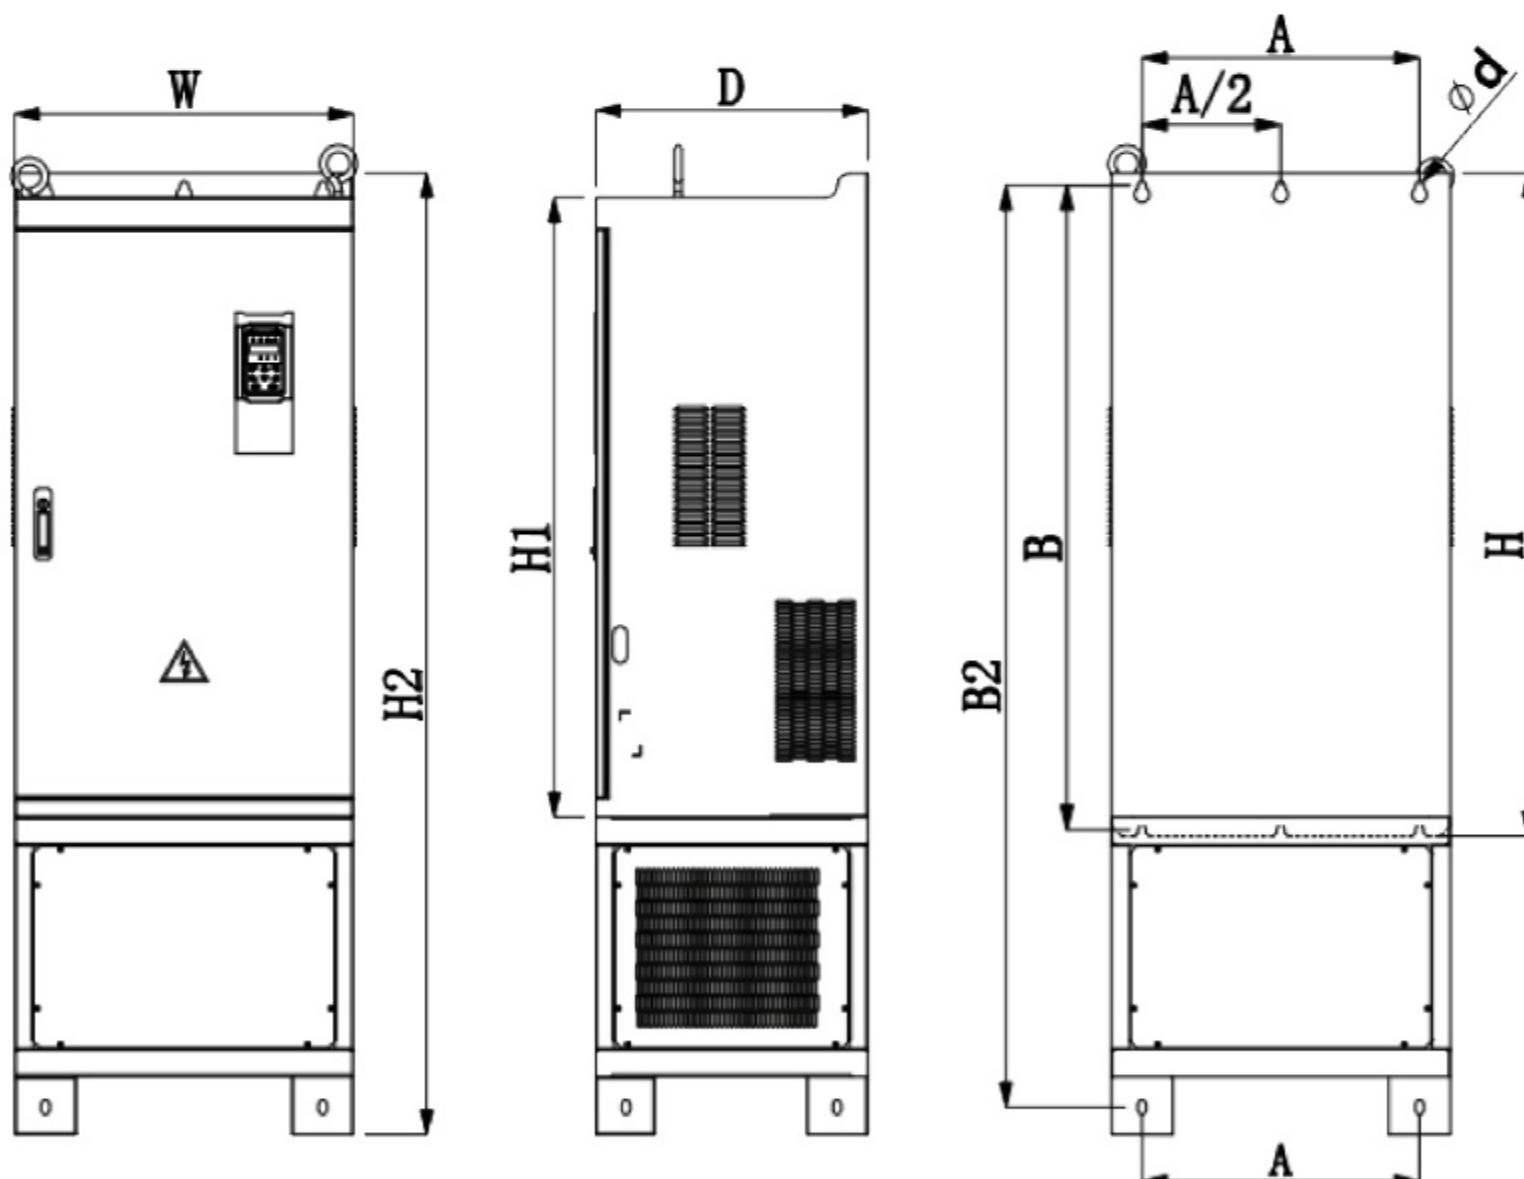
SIZE K~J(280KW-315KW) Dimension
